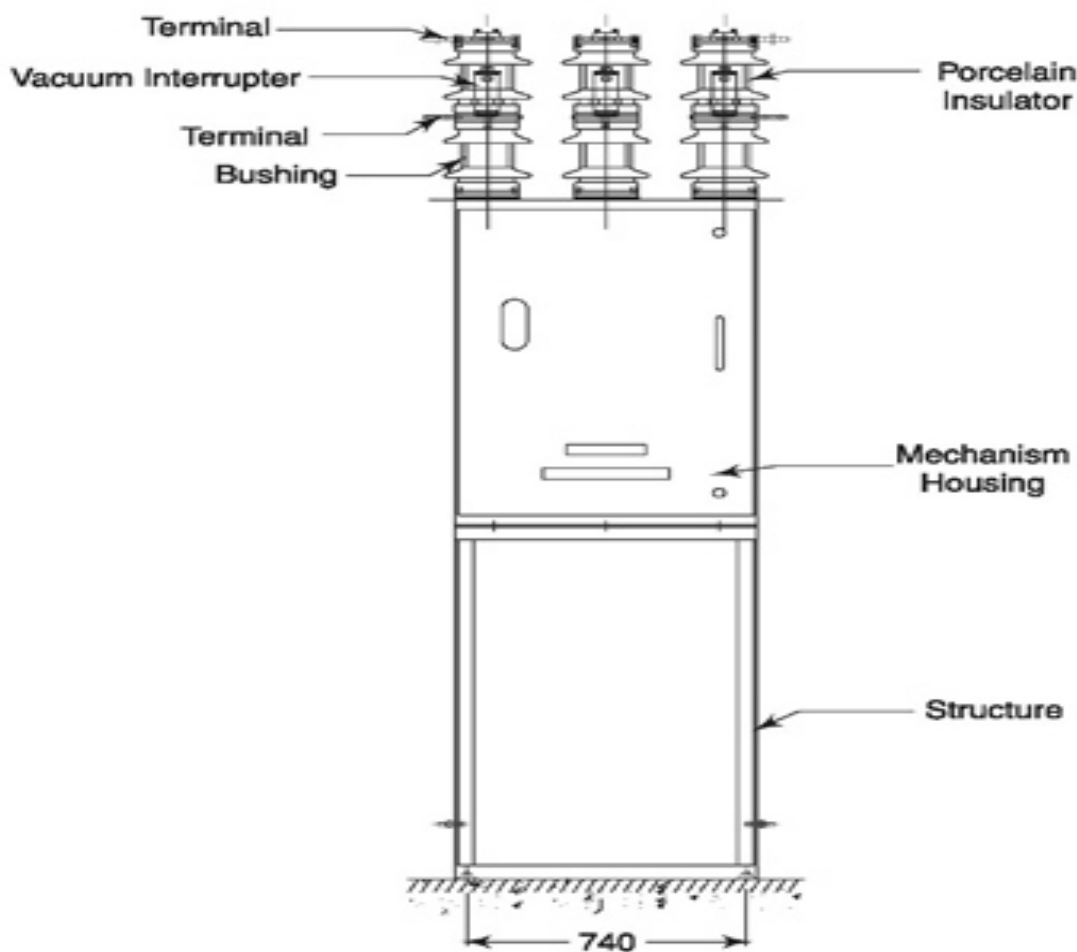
Live tank switchgears (outdoor porcelain clad-construction)
